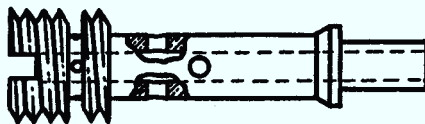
When original main fuel nozzle is removed from "LM" series carburetor, it must be discarded and service type nozzle shown must be installed.
